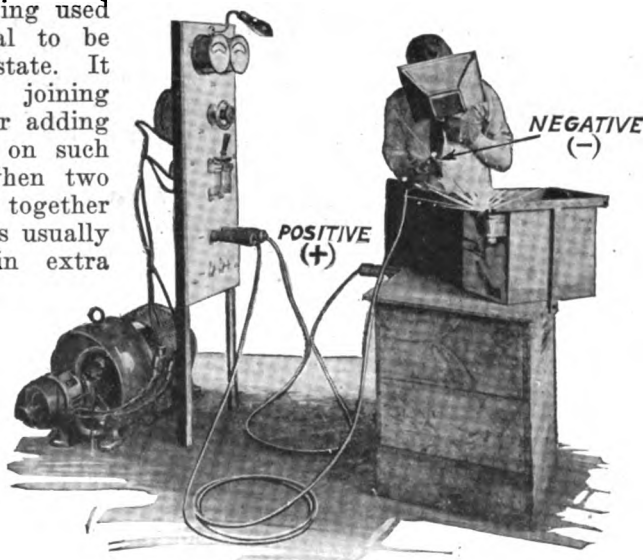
In arc welding, one wire (the positive) from the welding apparatus is attached or laid upon the steel which is to be welded, the other wire (the negative) is attached to the electrode of carbon or metal which the operator holds.
